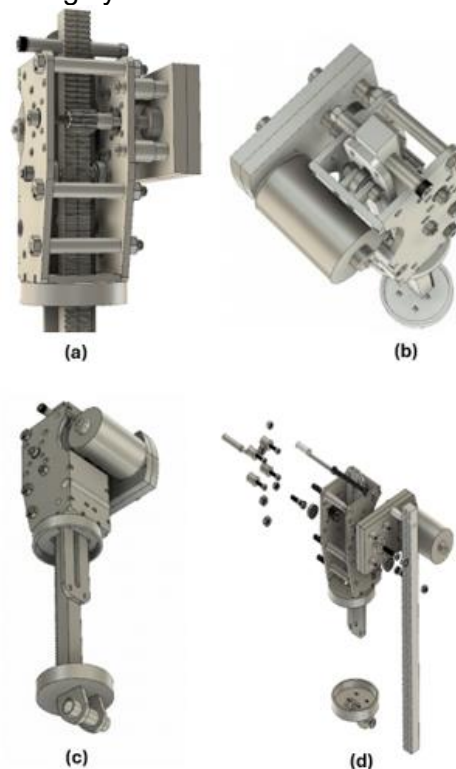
(a)Front view, (b)Top view,(c) Rear view,(d) Exploded View
